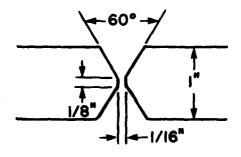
WELD JOINT CONFIGURATION FOR THE GMAW EXPERIMENTS
